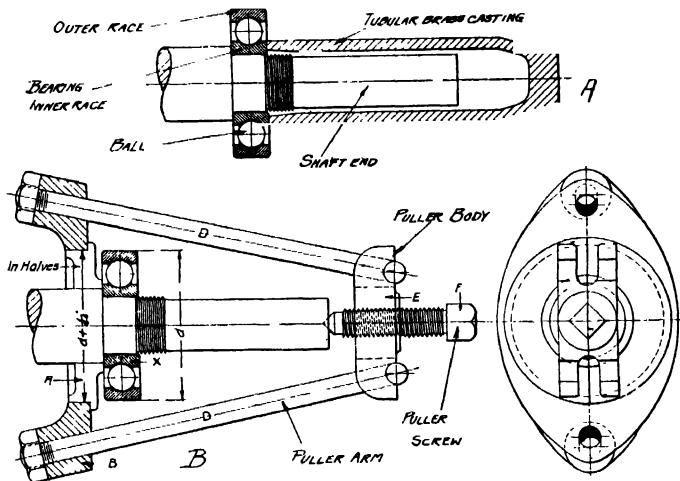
A.—Simple Tools for Ball-Bearing Installation and Removal.
